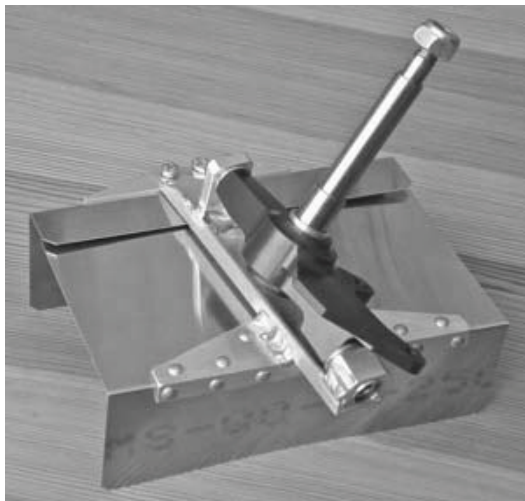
Riveted lightweight structure for attaching front wheel to platform, with thin aluminium sheet for adhesive bonding to thick sandwich plate.
